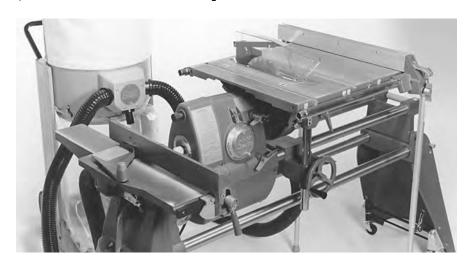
The saw/jointer setup lets you square up one edge of a board before beginning a sawing operation. This produces a smooth, straight edge to place against the rip fence. A dust collection system is shown attached to both machines.
